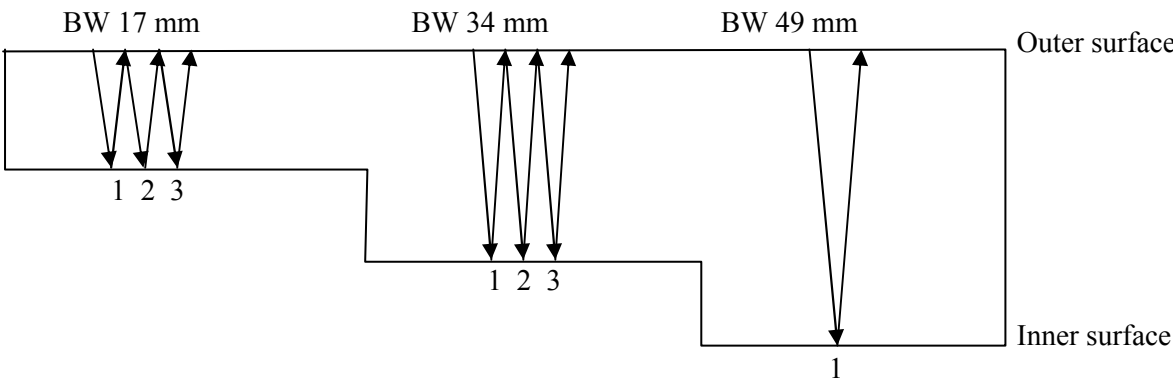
Sketch of the back wall echo positions for test samples T53-960-125 and T53-960-220.
